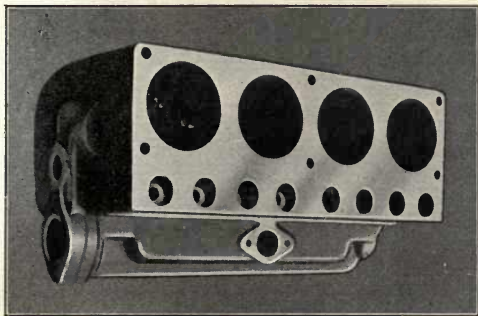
Multiple cylinder for an automobile engine as finished by grinding.
